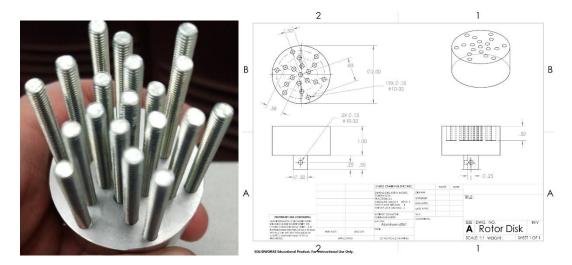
(left) Prototyped Cultivator (right) Design Drawing
